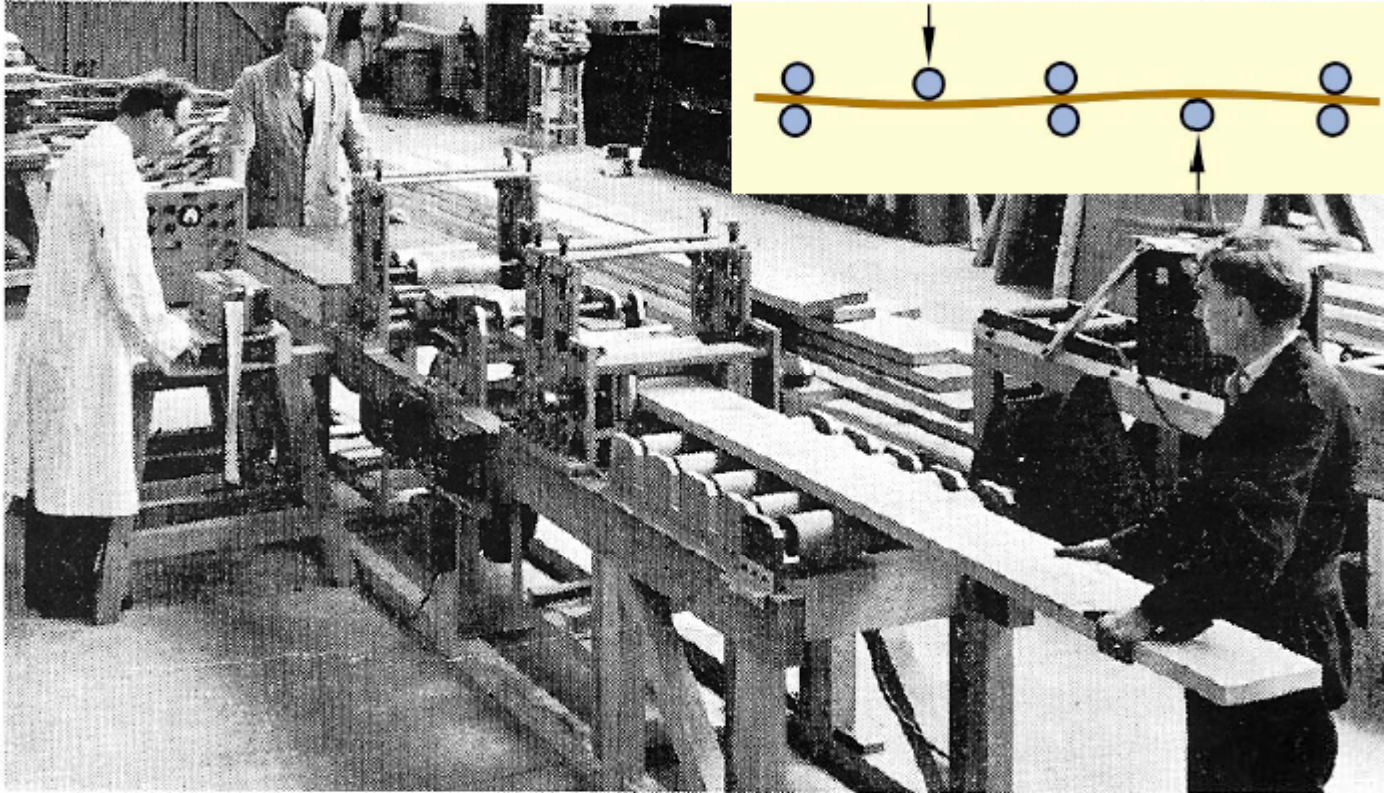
Experimental model of Princes Risborough stress-grading machine. 1962
